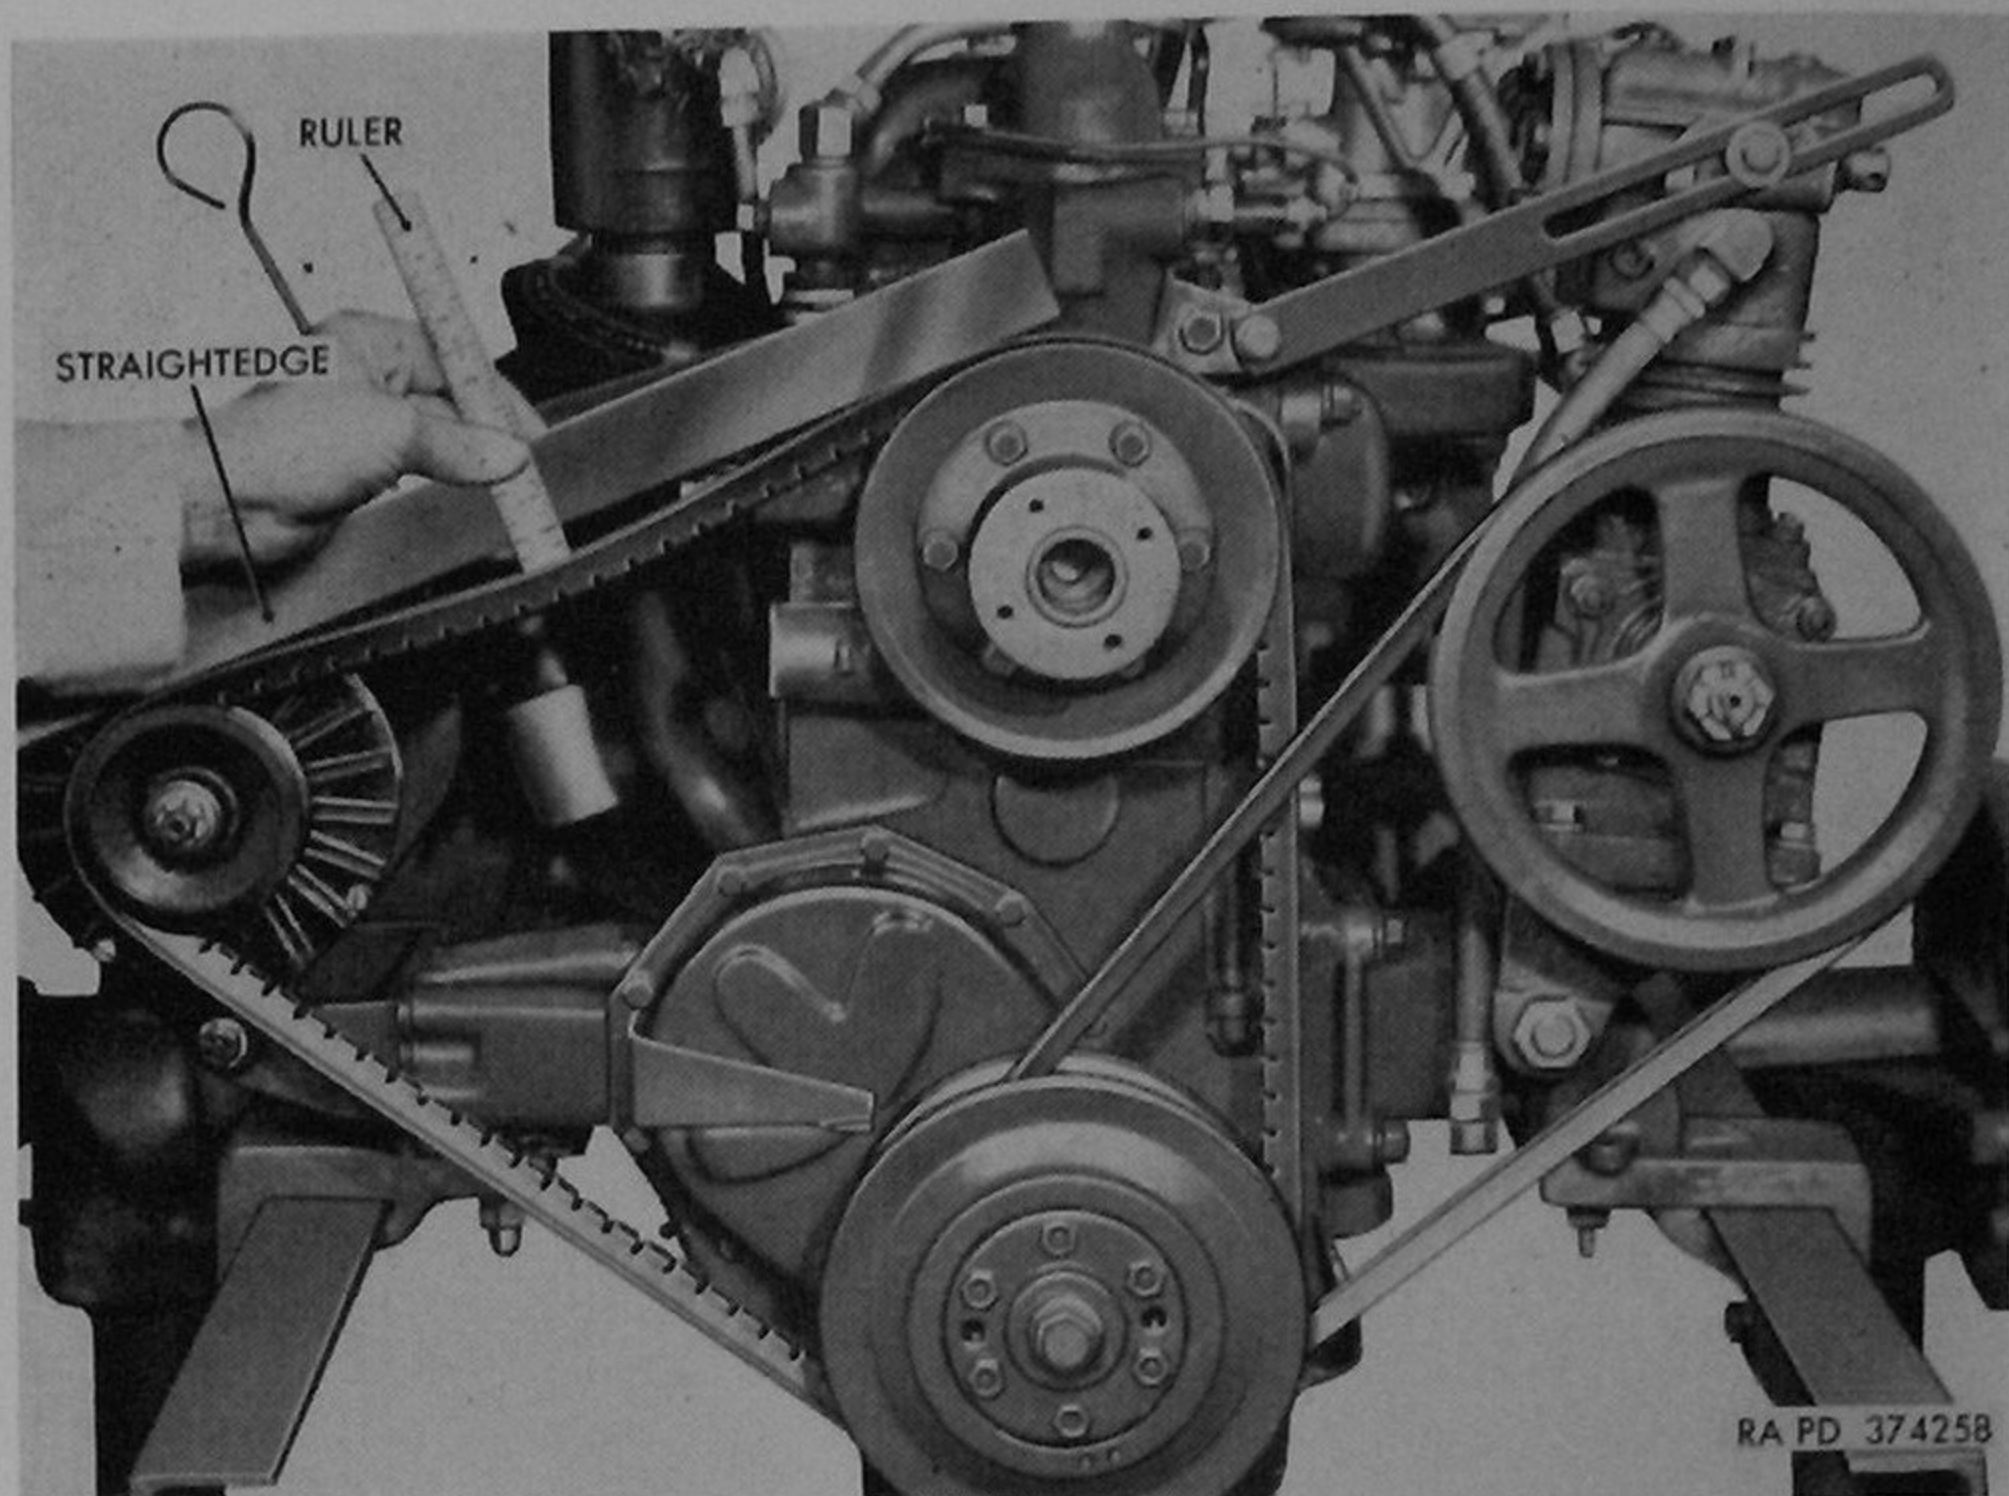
Checking drive belt tension—engine assembly 7411599 shown.
